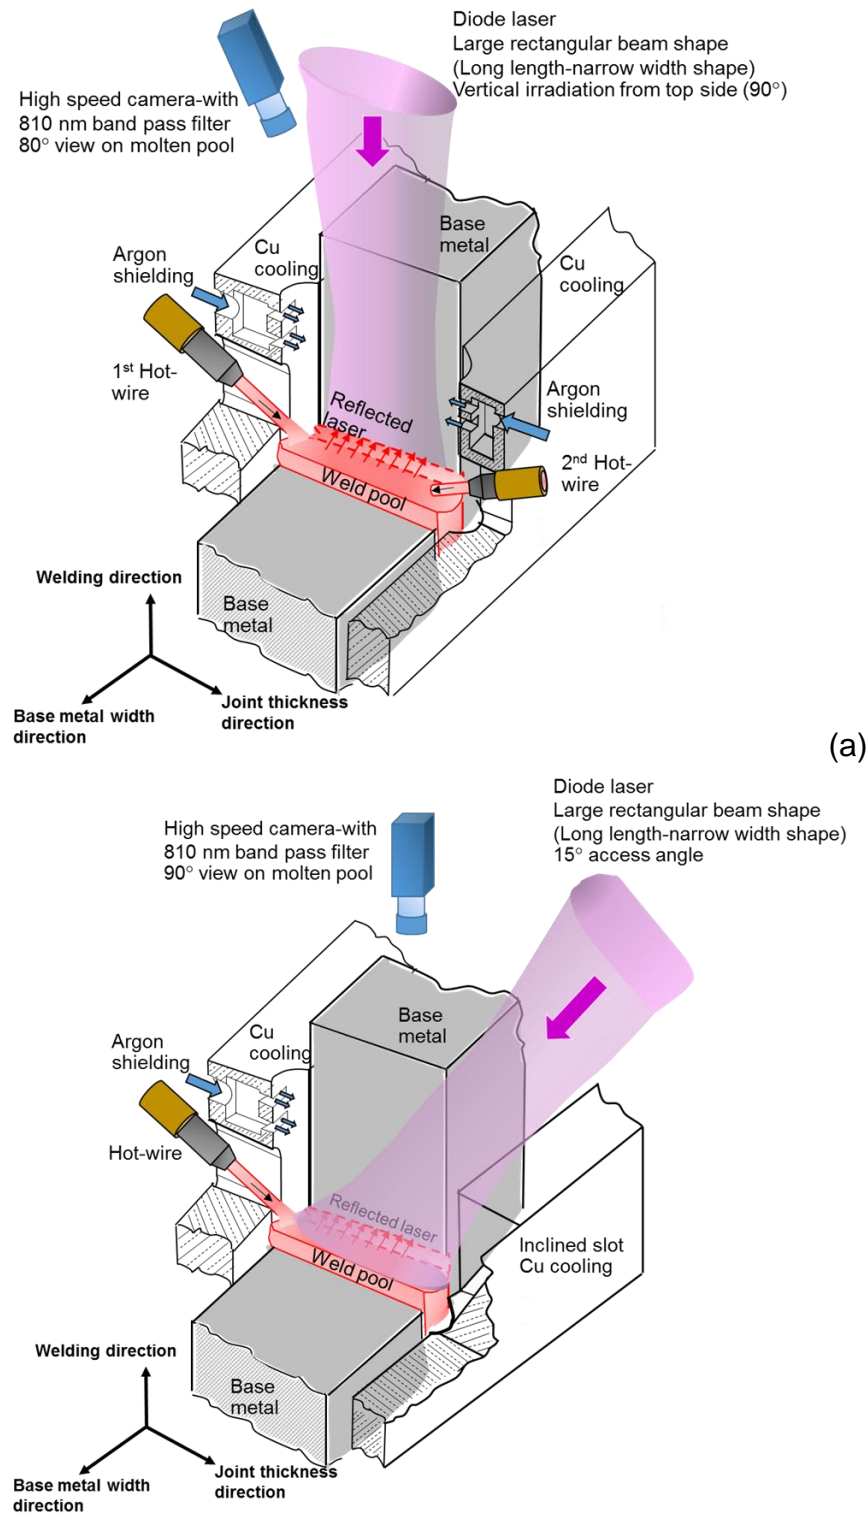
Schematic layout of joint configuration and apparatus of the hot-wire laser method by (a) Vertical laser access-with 2 hot wires and (b) Oblique laser access-with 1 hot wire method.
